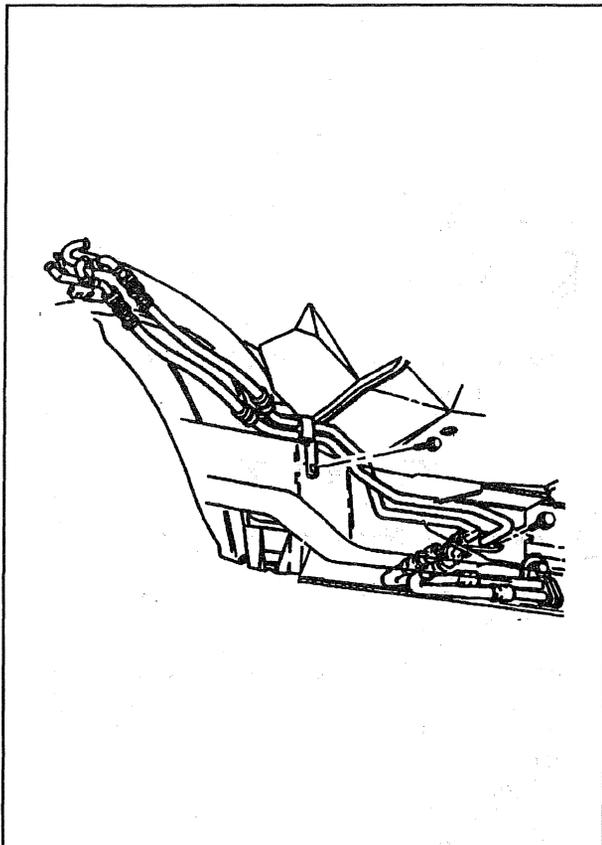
Auxiliary Heater Hose Assembly Routing (Front) (Gas Engine)
